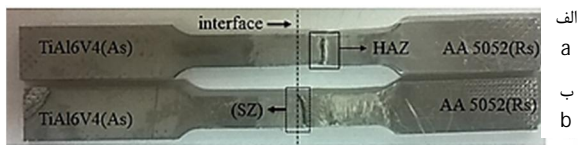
The image of fracture of the fractured specimens in tensile test (a) sample 1 (b) sample 8
